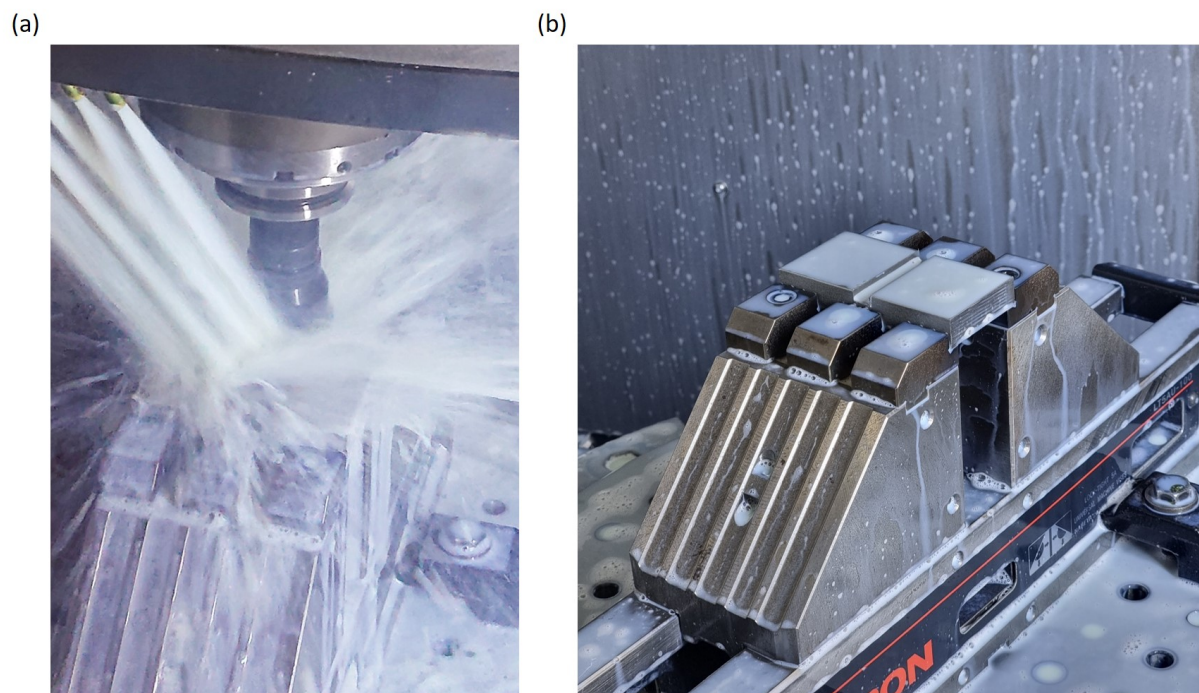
(a) Cutting fluid projection during milling operation and (b) cutting fluid residue in the manufacturing chamber after milling.
